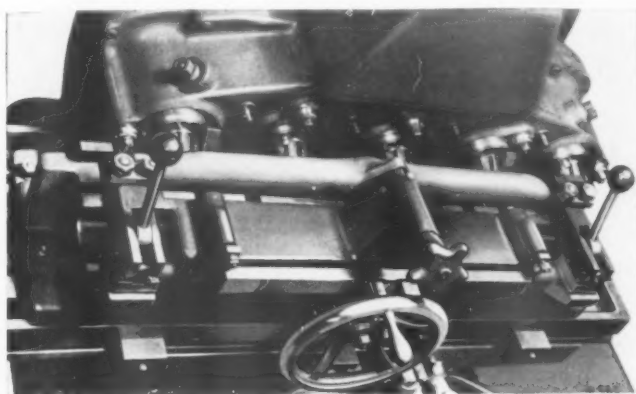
Showing exhaust manifold clamped in position for milling five surfaces simultaneously.
